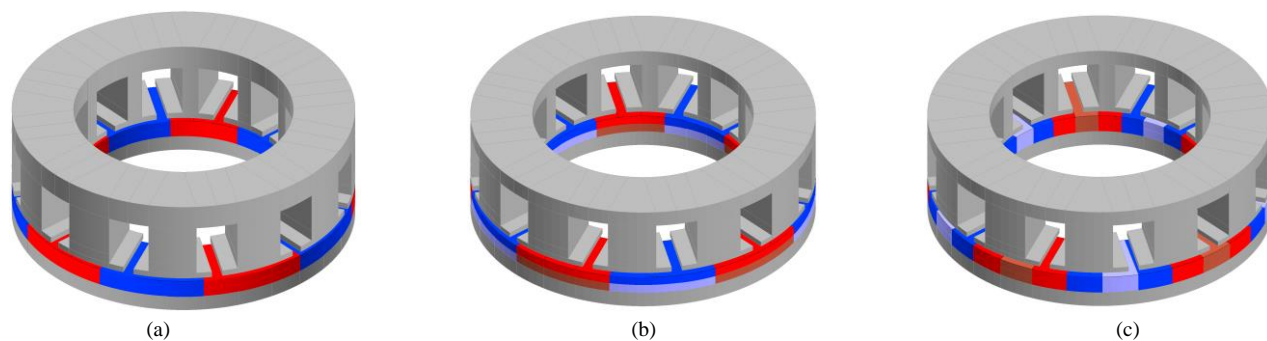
The structure of the studied AFPM motors, (a): Baseline AFPM machine with single-layer bonded magnets, (b): AFPM machine with double-layer magnet with a series arrangement, (c): AFPM machine with double-layer magnet with a parallel arrangement.
